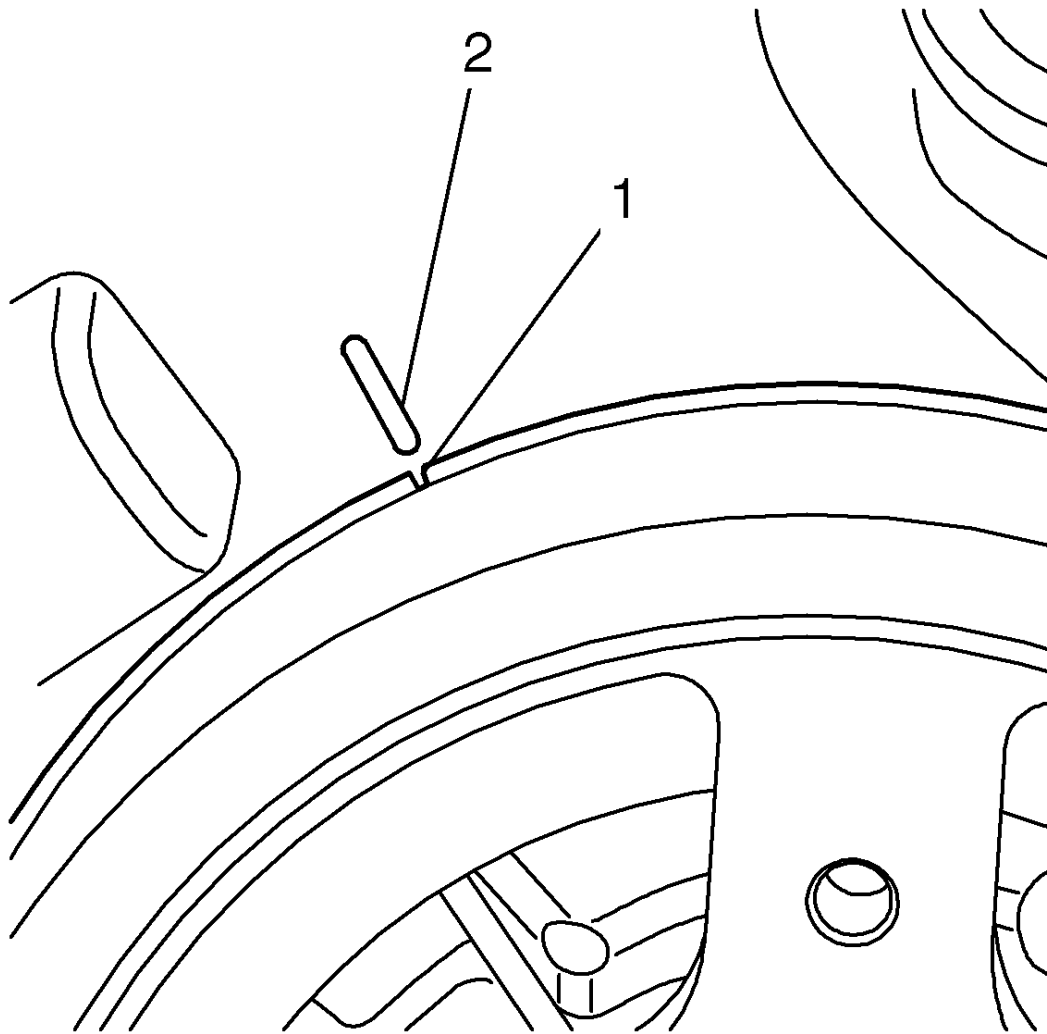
Crankshaft Balancer Mark And Oil Pump Housing Mark
